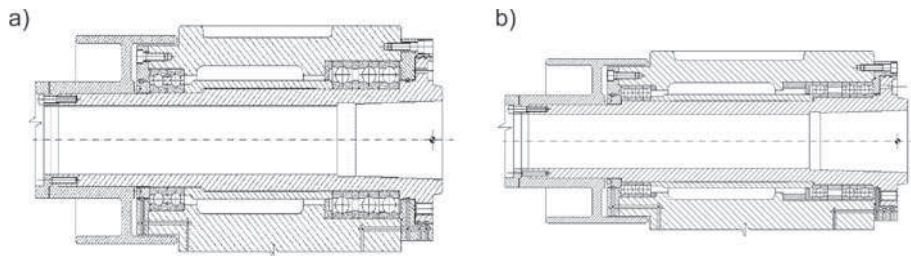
Headstock of SBL 500, a) original design, b) optimized design
